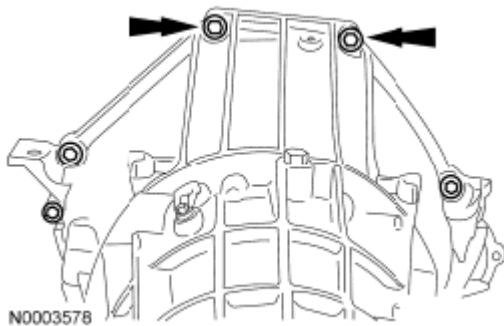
Locating Upper Transmission-To-Engine Bolts
